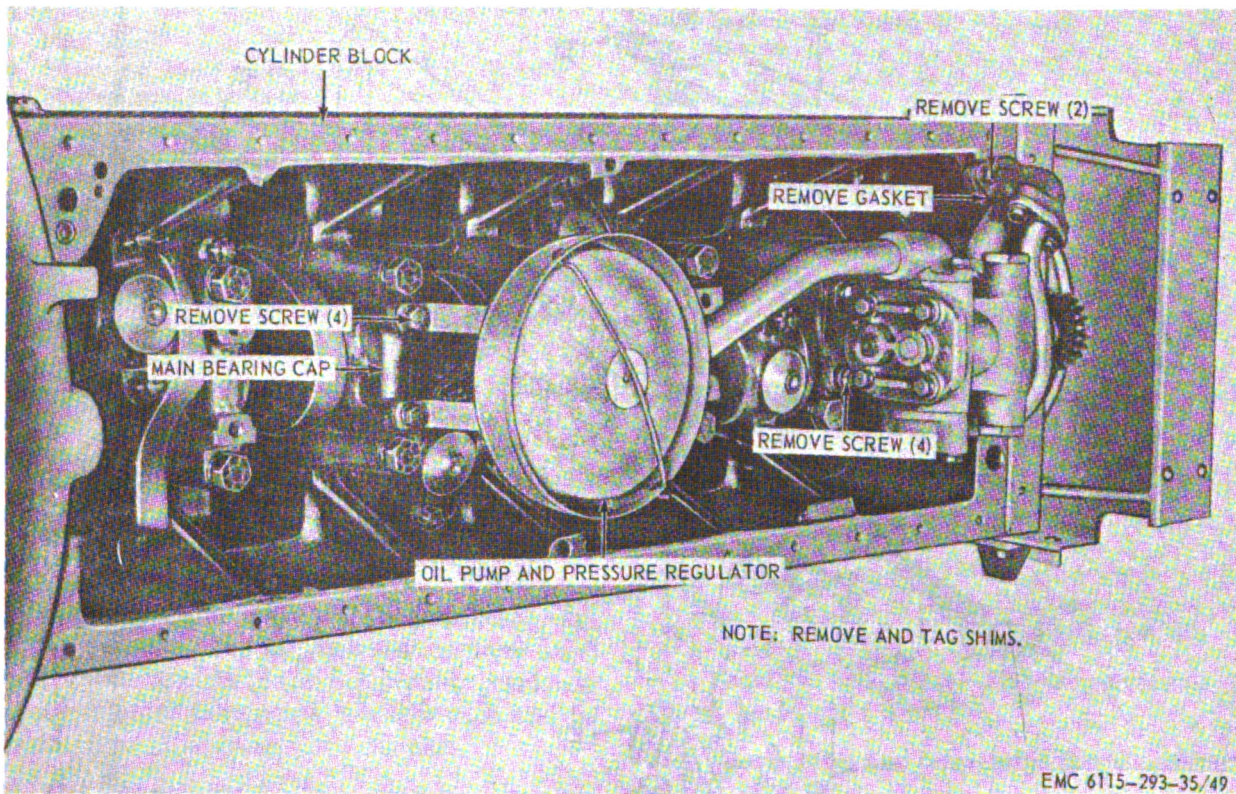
Engine oil pump and pressure regulator, removal and installation.
